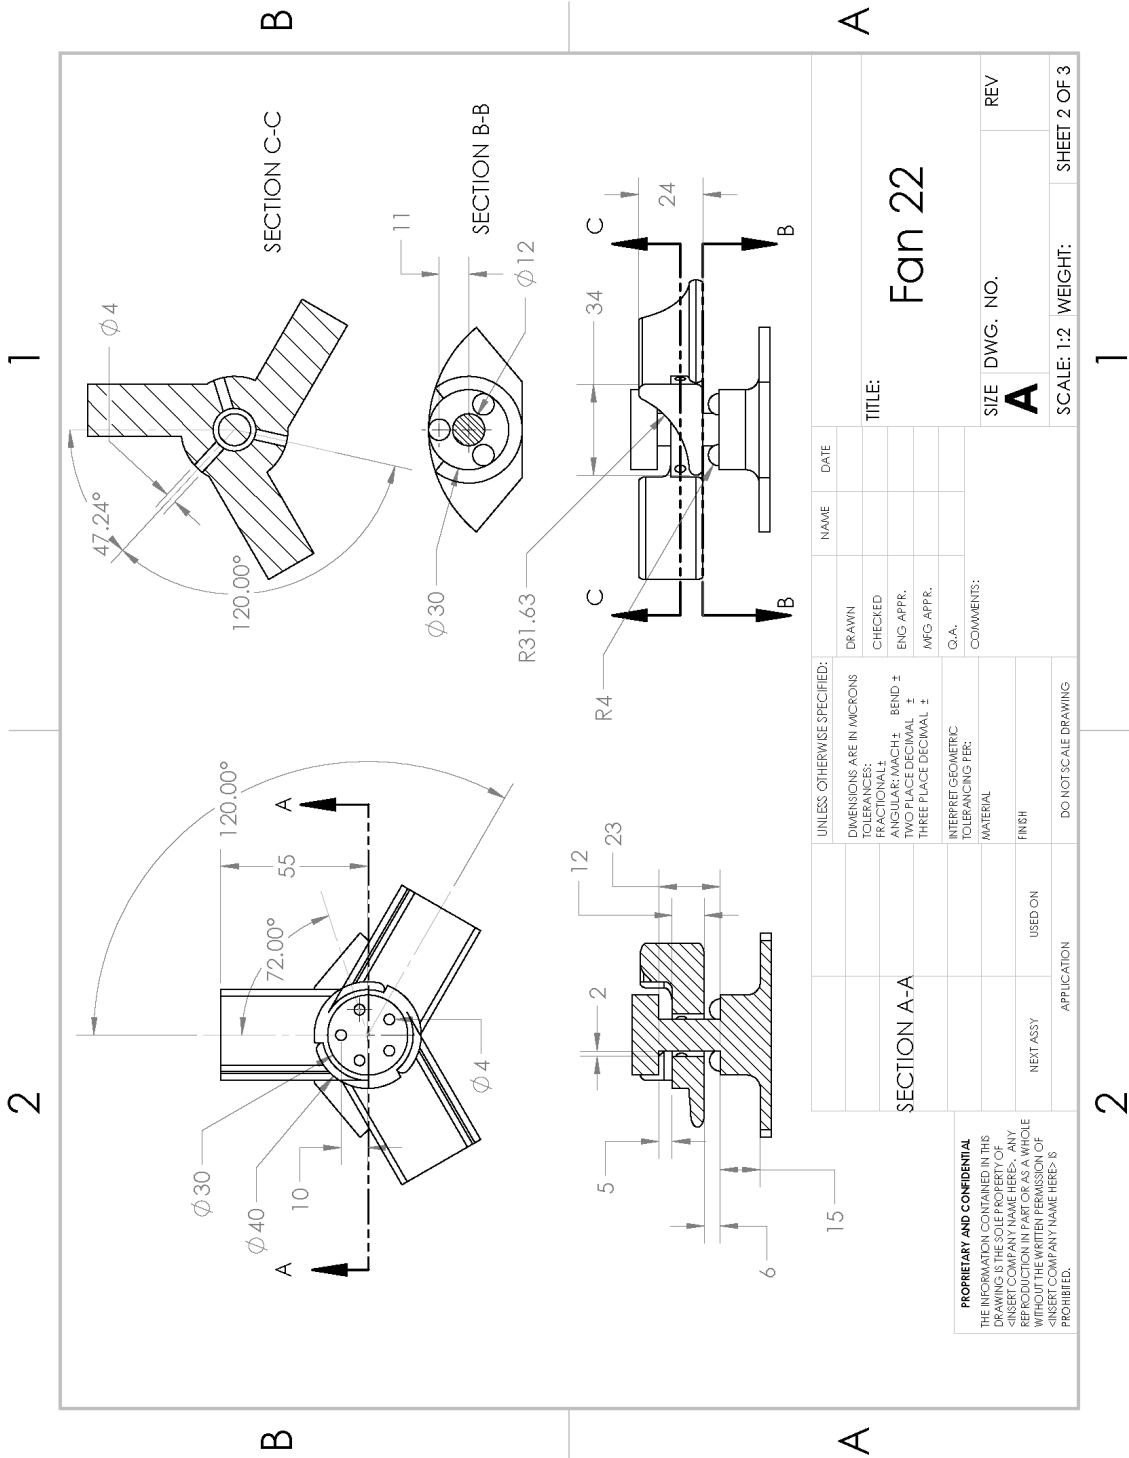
Technical drawing of the spinning flow sensor device, page 2.
